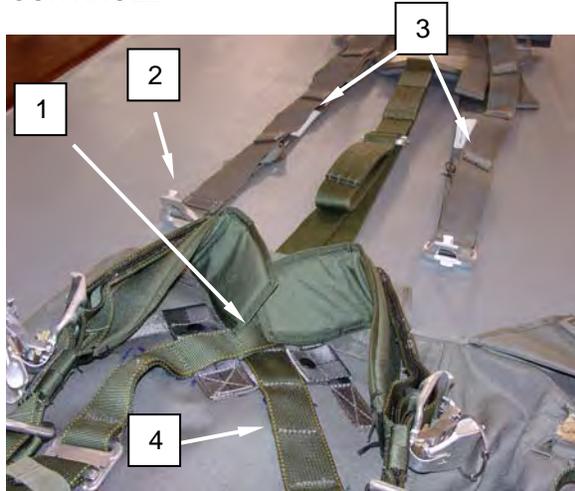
Laying Out Risers and Harness Assembly, and Assembling Risers and Harness Assembly.
